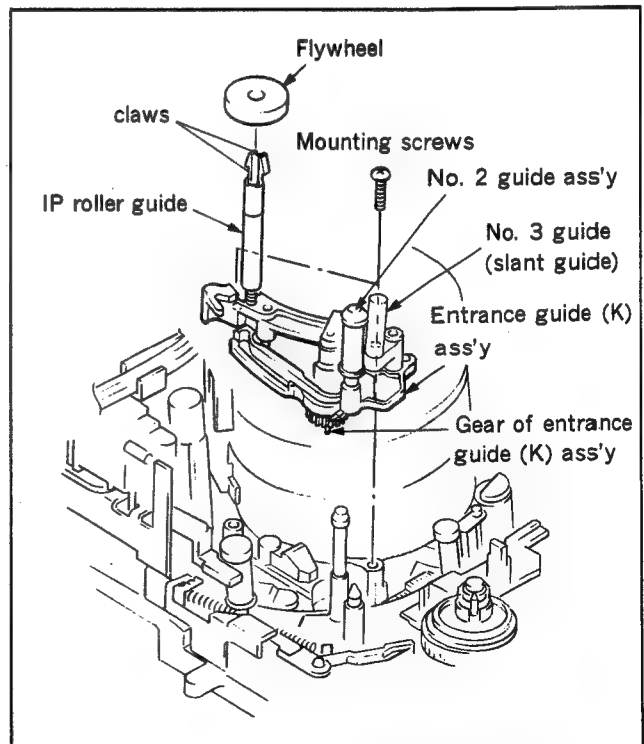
Parts of entrance guide (K) ass'y
